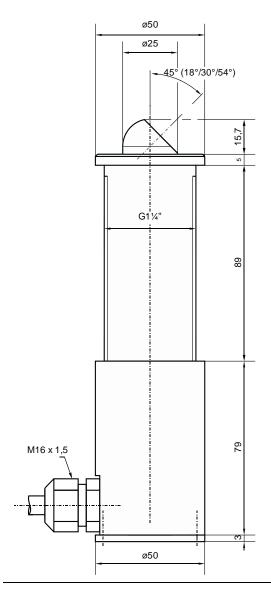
Dimensioned drawing plug-in sensor Type NOS-V2S
